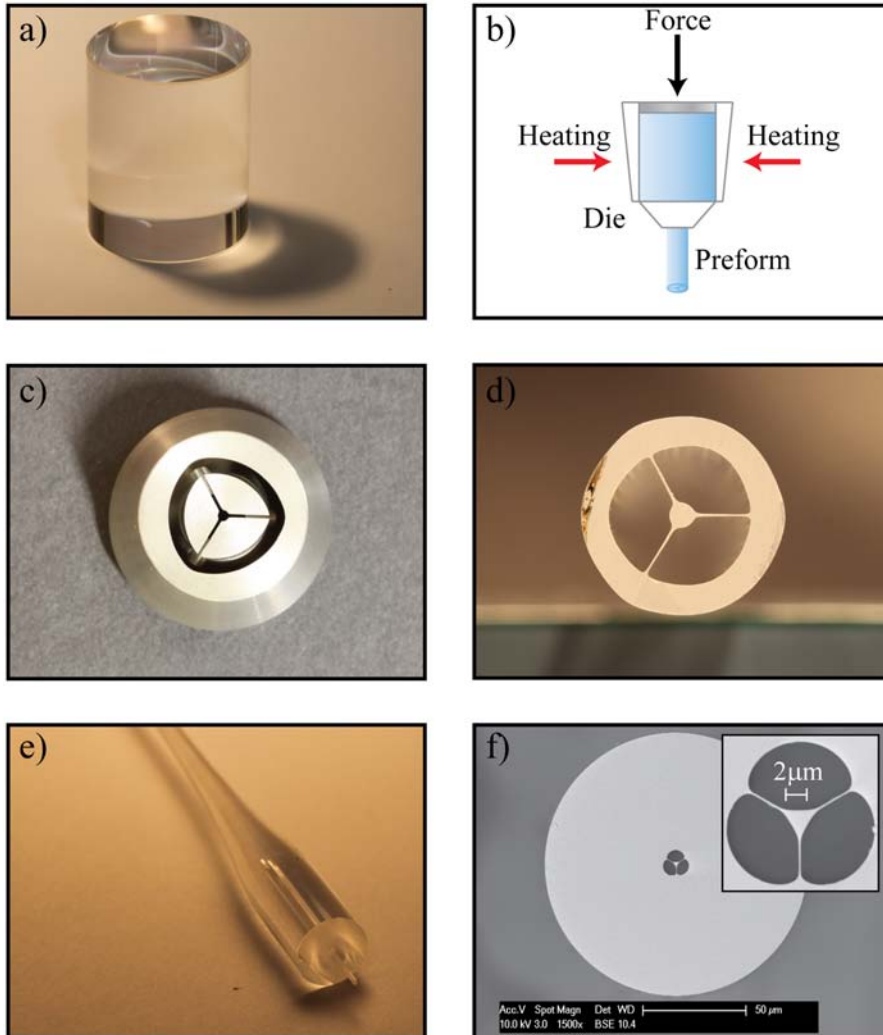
Extrusion a) F2 Glass Billet b) Schematic of extrusion scheme c) Example extrusion die used for F2 suspended core preform fabrication d) Preform after cutting e) First section of fibre draw, showing cane of the preform in d) inserted into a 10 mm tube. The diameter of the structure tapers rapidly in the initial stages of the drawing process f) Final fabricated fibre.
